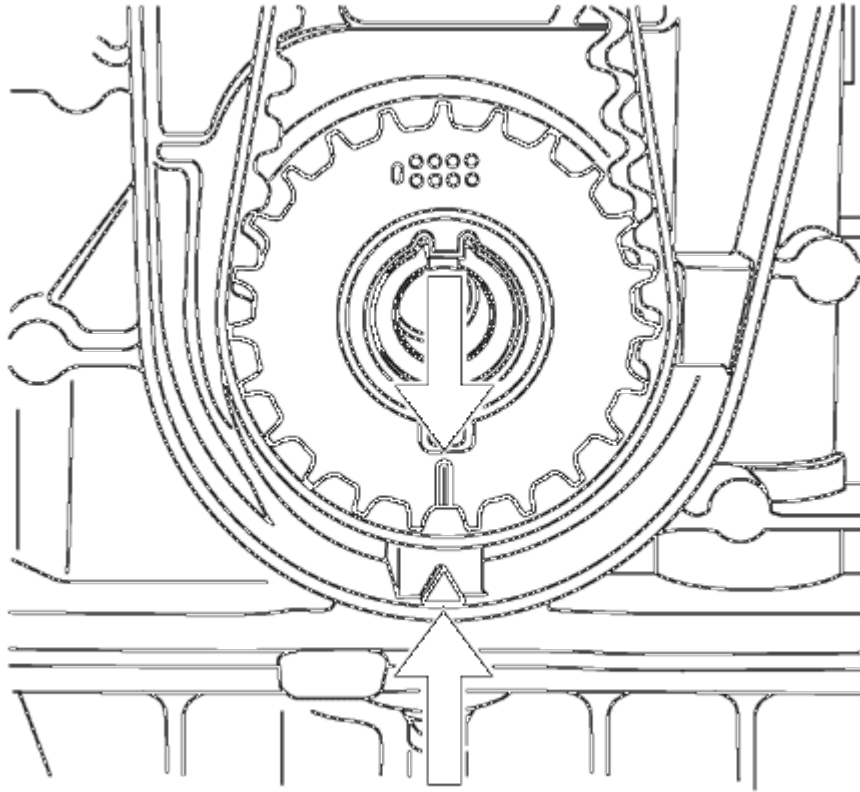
Aligning Timing Belt Drive Gear And Oil Pump Housing
